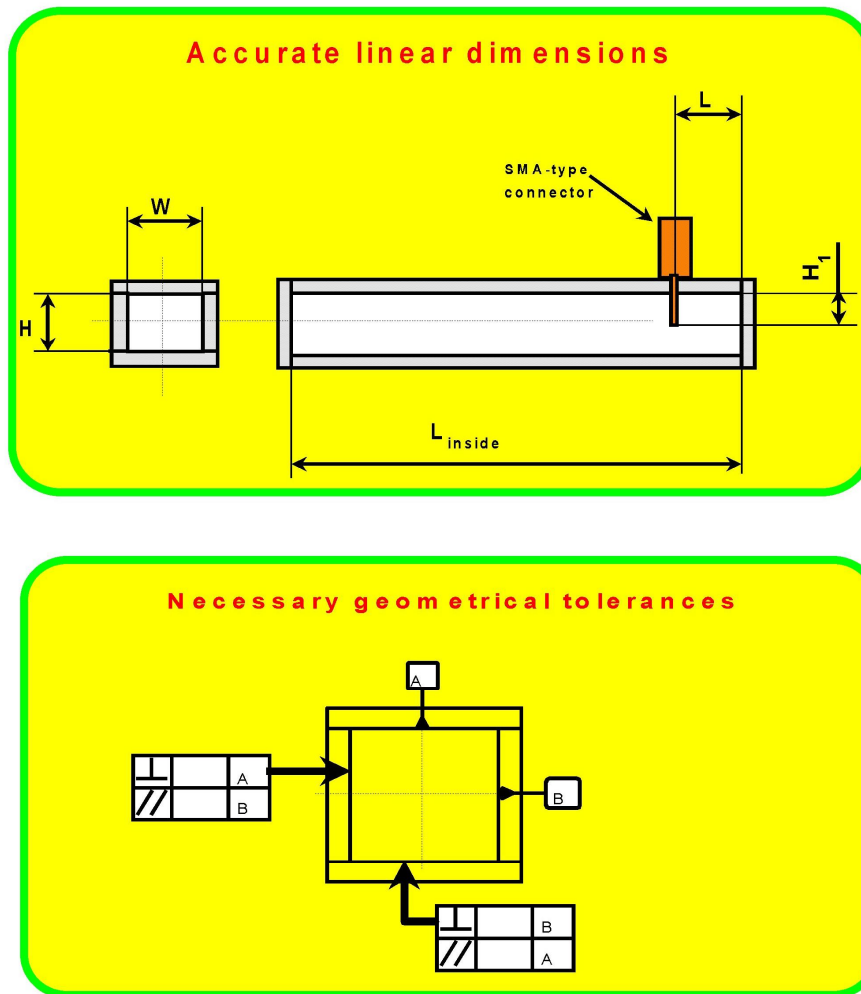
Other geometrical and dimensional tolerances are needed e.g. to ensure the quality of the waveguide part. In addition to these angular tolerances are needed for the pyramid part of antenna.
